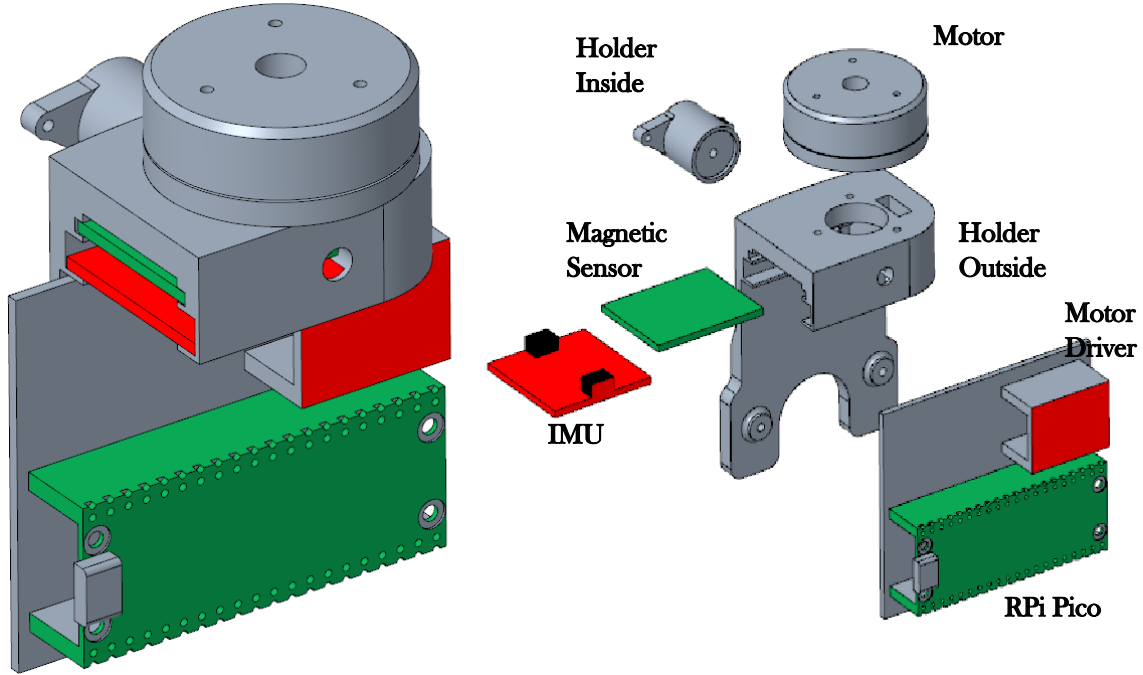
The combined mounting solution for holding the active MIS system, with an exploded view showing each component.
